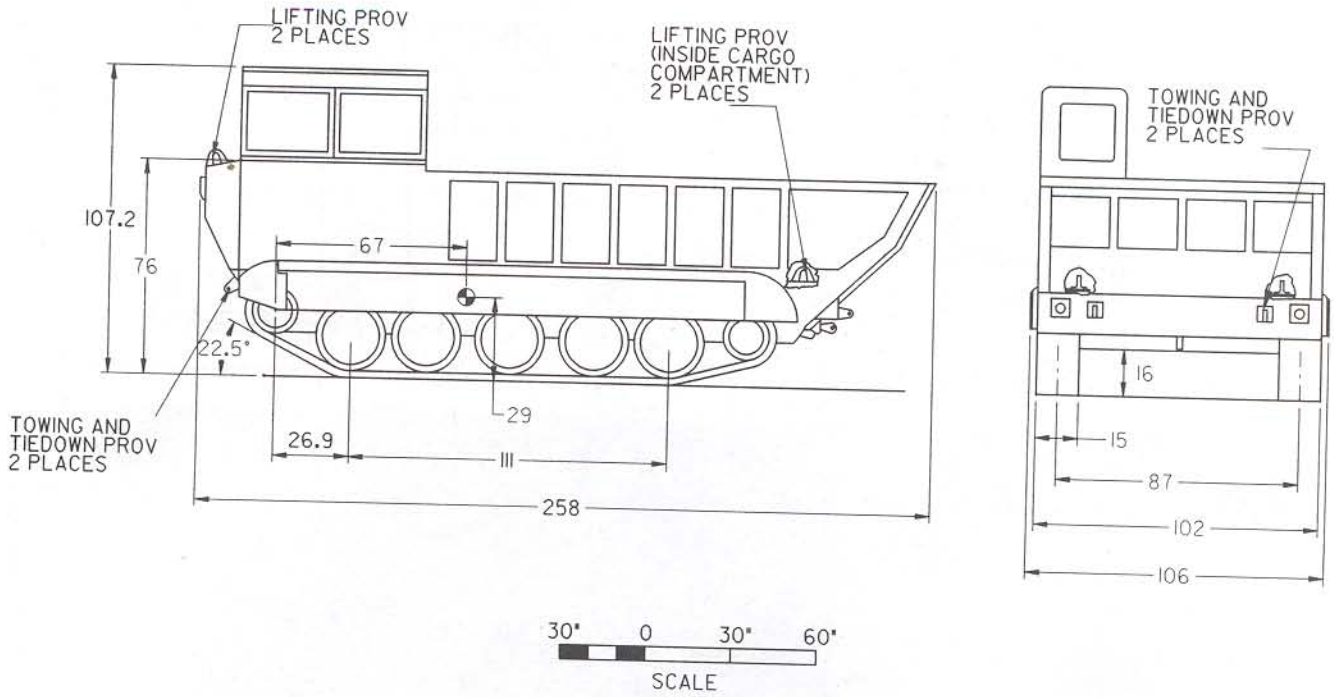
M667 Cargo Carrier. All dimensions are in inches.
